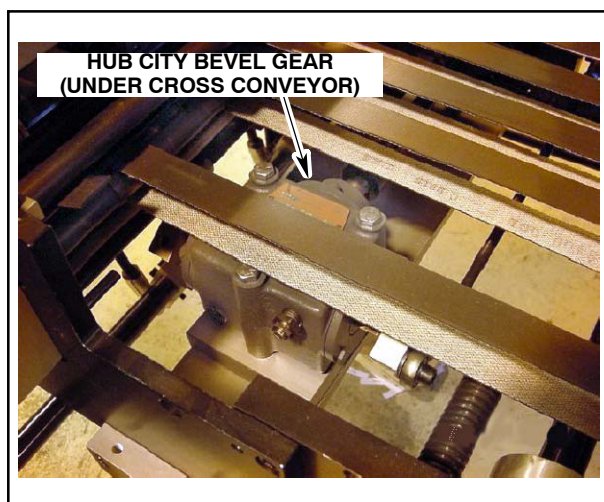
Kick Back Gearbox Location (Under Cross Conveyor)
